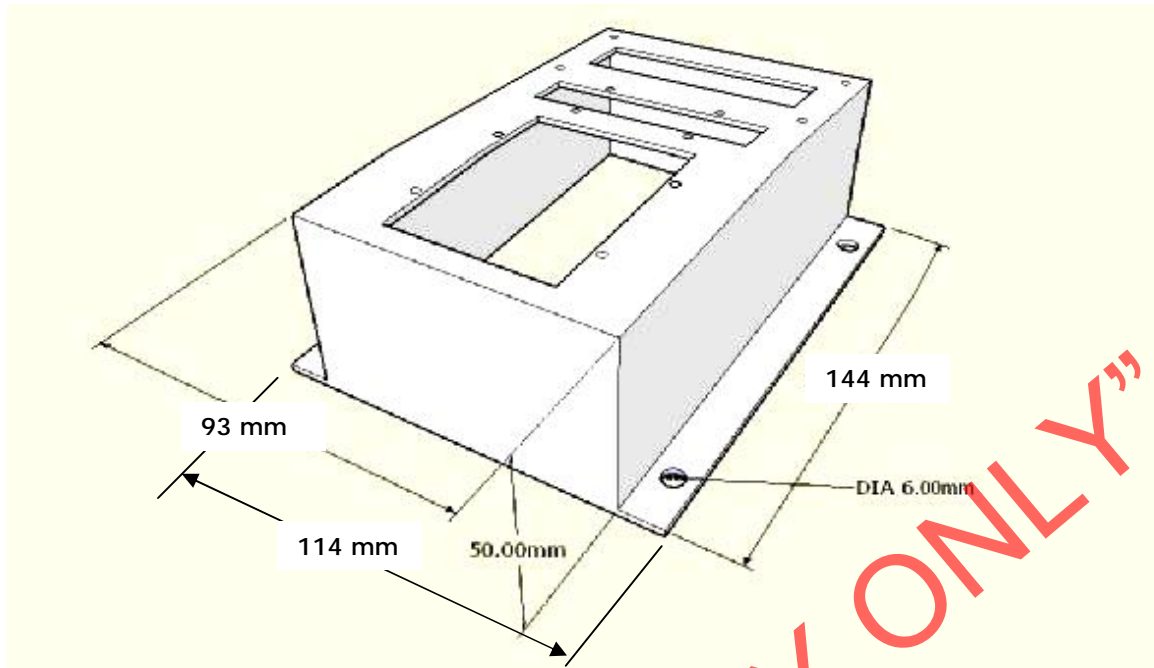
TDU Enclosure Dimensional requirements on the Driver Console/ Locomotive cab.
